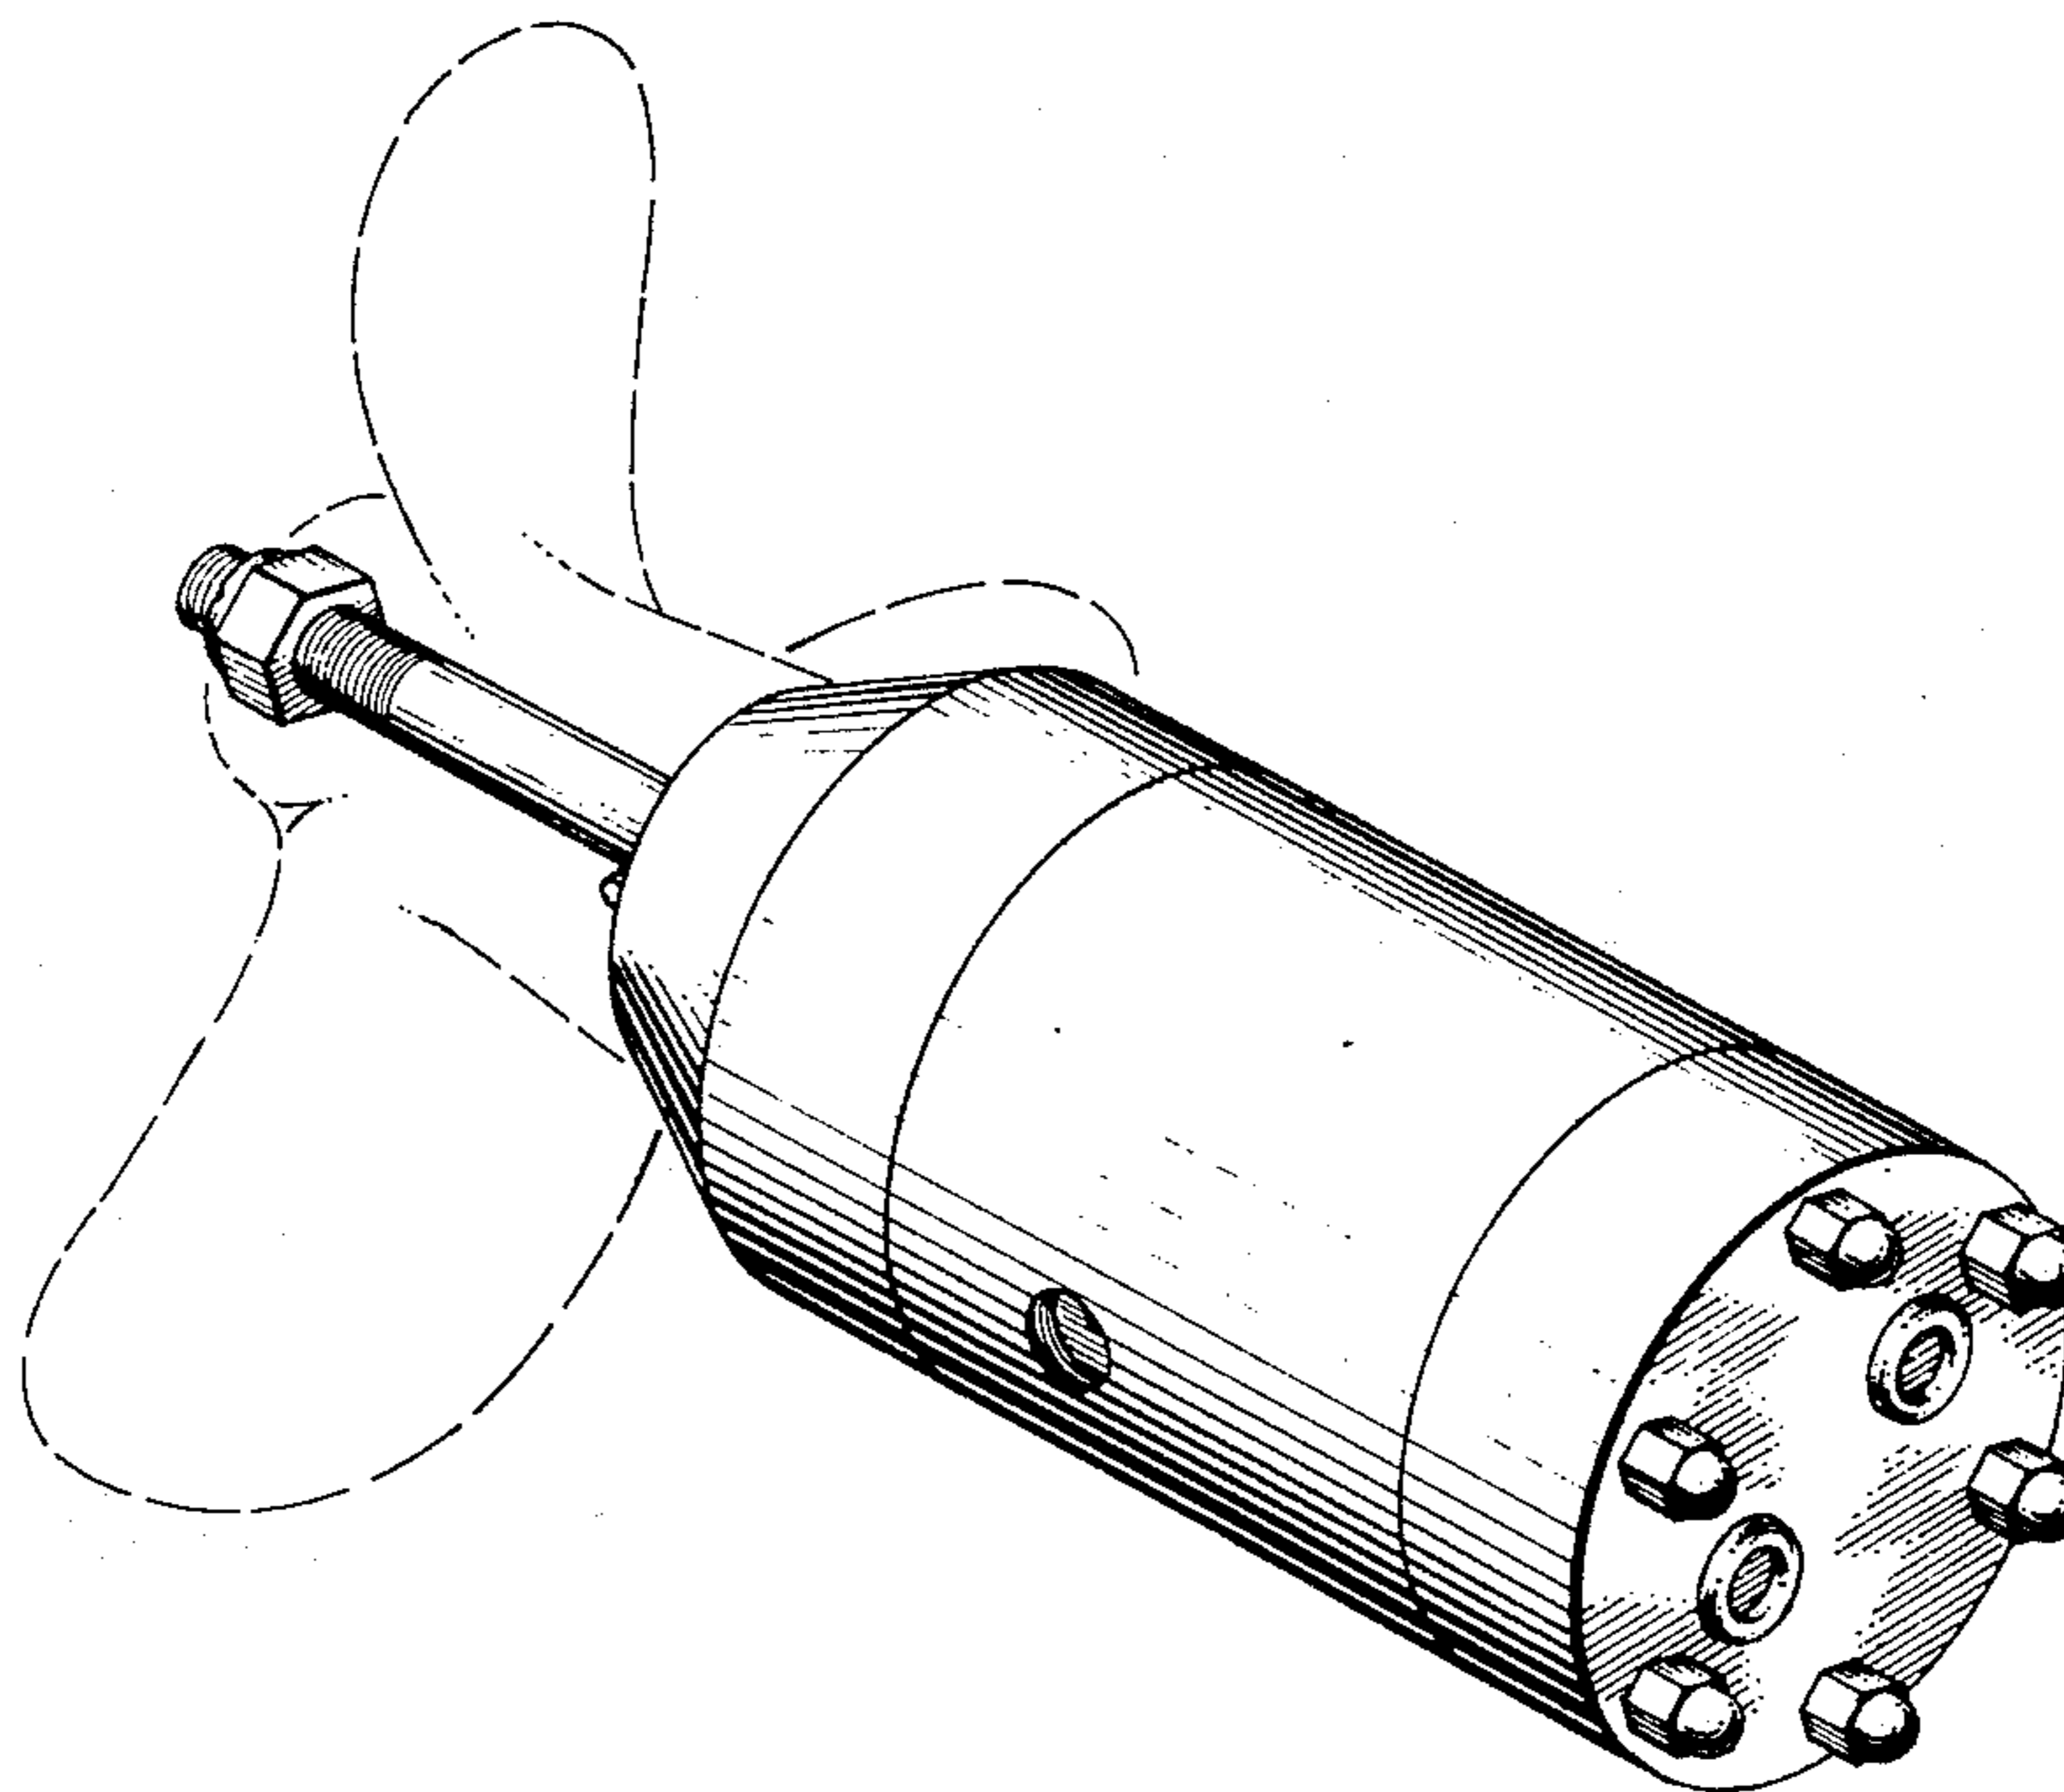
is a front perspective view of a reversible thrust motor for laterally maneuvering the stern of a boat, showing my new design, the broken line representing a propeller forming no part of the design;
